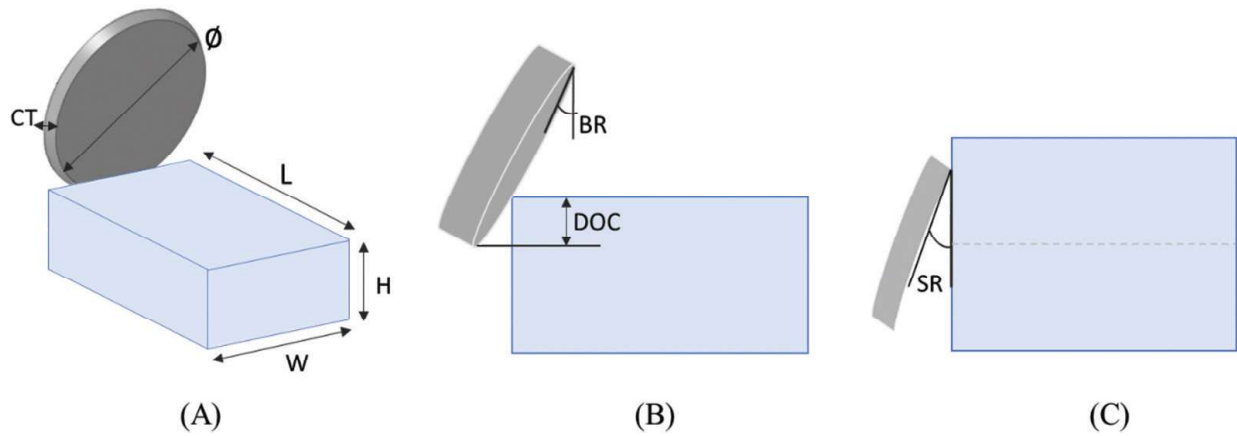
Schematic views of the model: (A) 3D view; (B) lateral view, (C) top view. [L = sample length; H = sample high; W = sample width; CT = cutter thickness; ϕ = cutter diameter; DOC = depth of cut; BR = back rake angle; SR = side rake angle]
